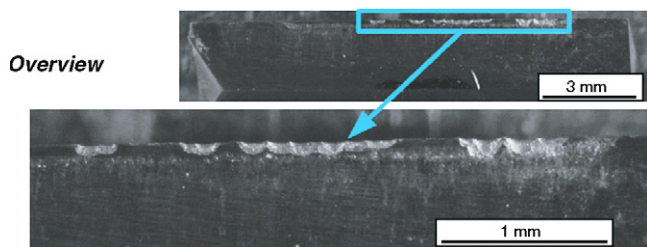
Micrographs of cutting edge insert S8 showing machining damage on clearance face/optical microscopy.
